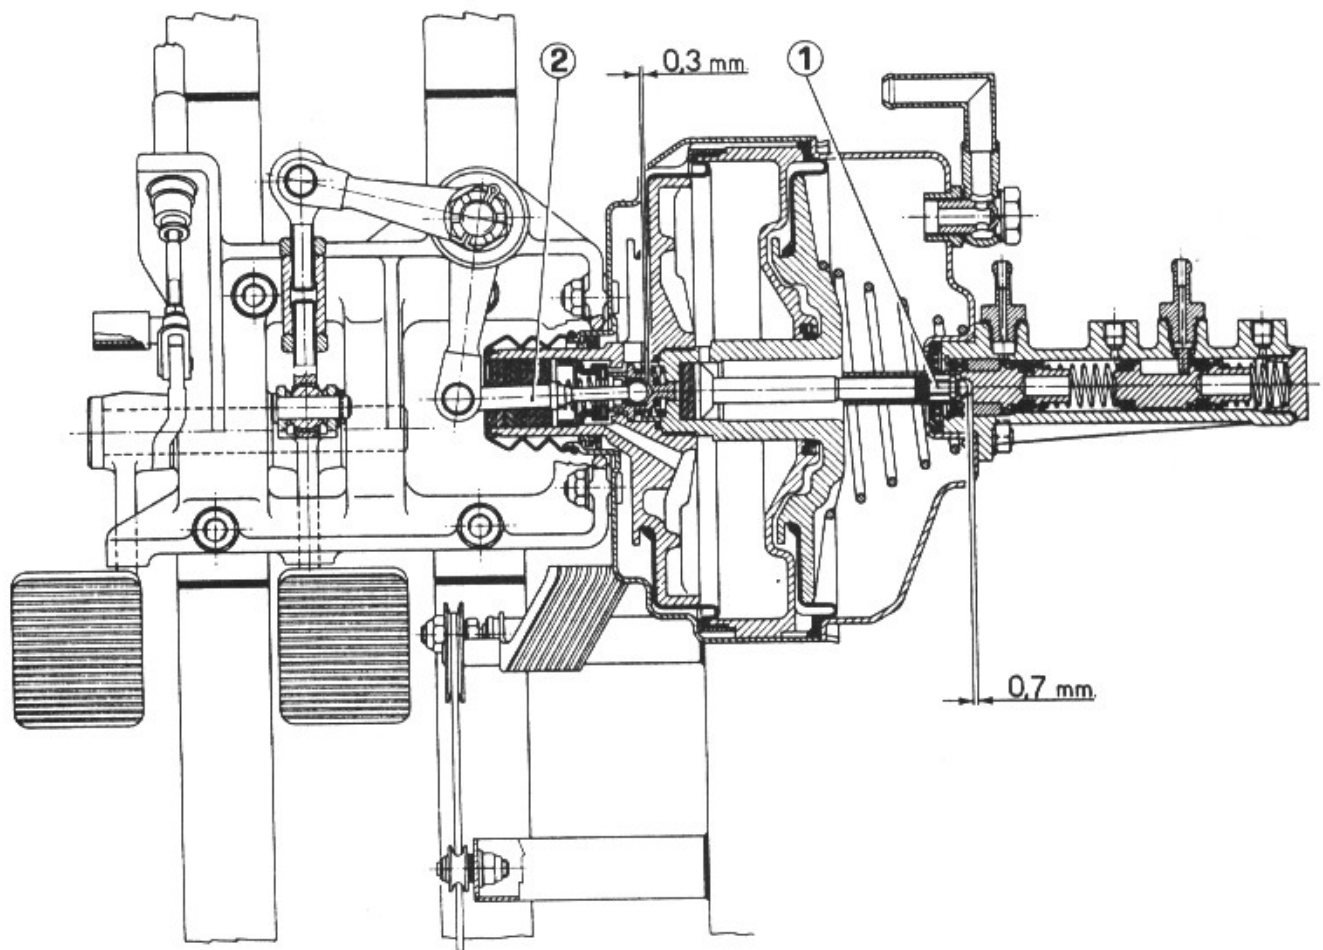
Side View of Brake Servo and Dual Circuit Hydraulic Cylinder
